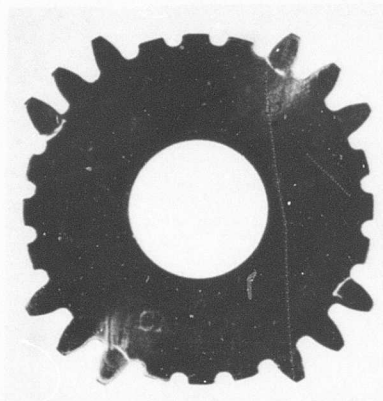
Photograph of Section Through Test Gear Showing Carburized Case Depth Around Root Fillet Contour.
